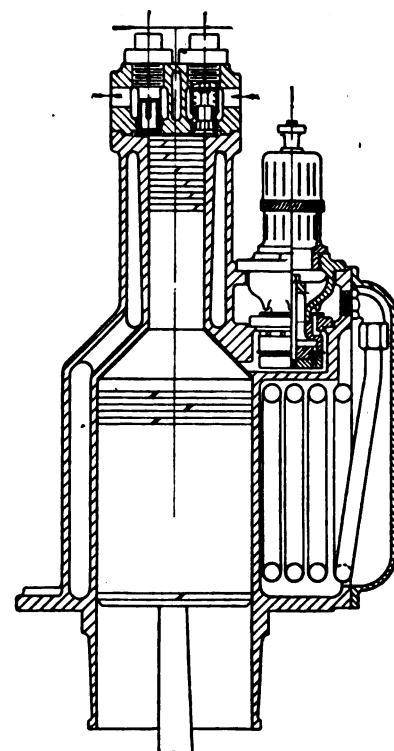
FULTON AIR COMPRESSOR, SHOWING GENERAL ARRANGEMENT OF HIGH AND LOW PRESSURE VALVES, AND COIL FOR FIRST STAGE COOLER
